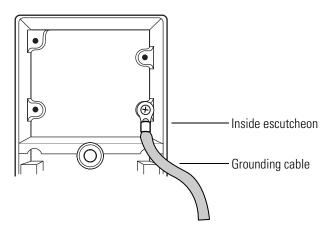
Connecting the grounding cable for Keypad EZ Locks
